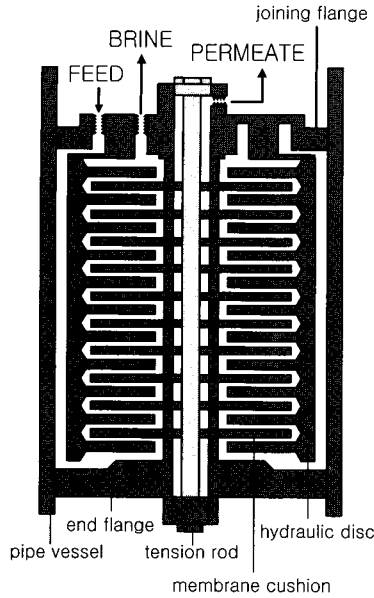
Schematic drawing of disc plate and frame type module and housing.
